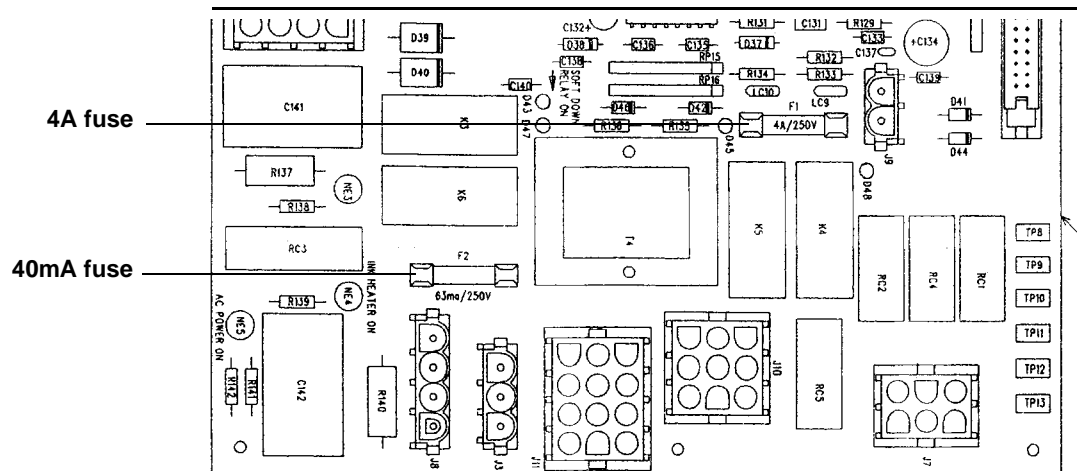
ACHV board fuses (0178609 and 0178714)
